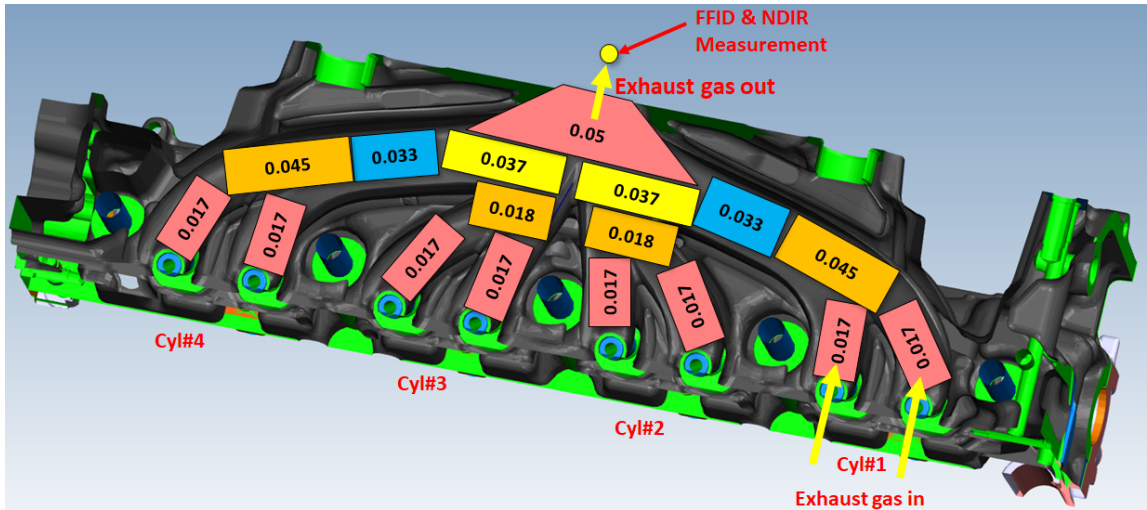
The test engine exhaust manifold sectioned 3D model
